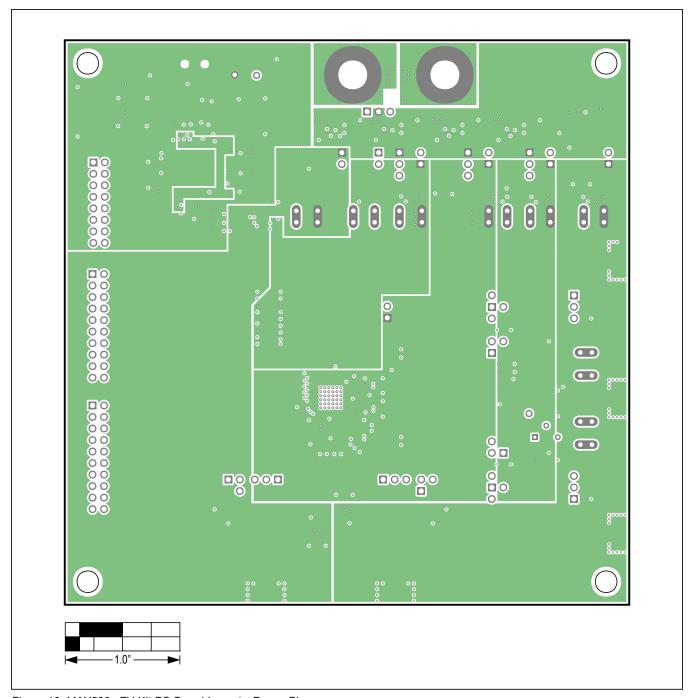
MAX586x EV Kit PC Board Layout—Power Planes
